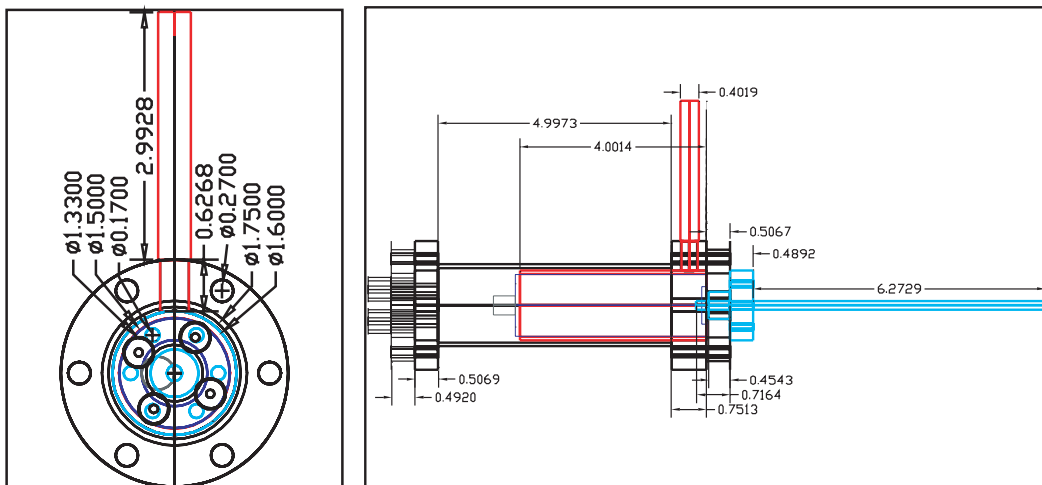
CAD Drawing of the Light Pipe Detector: Dimensions. (All dimensions are indicated in inch.)
